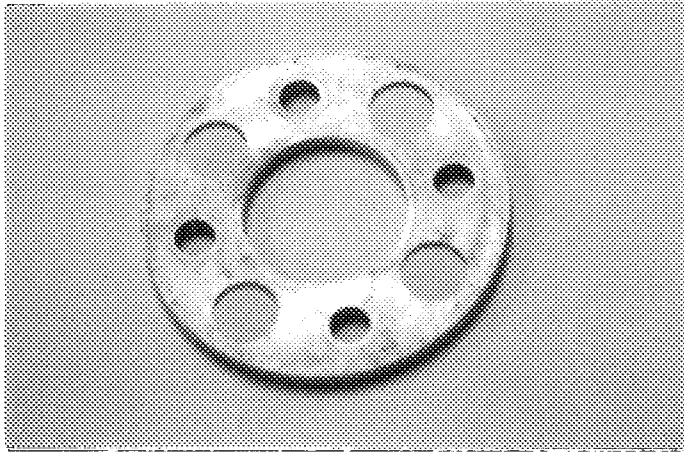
Front and/or Rear wheel scraper, TYPE C
